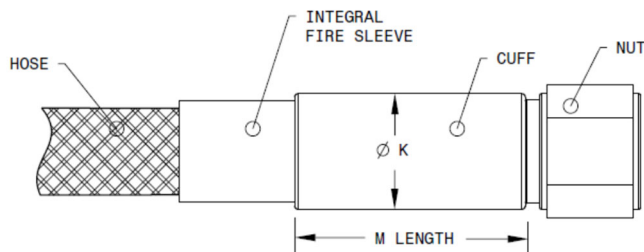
INTEGRAL FIRESLEEVE CUFF DIMENSIONS - SEE TABLE 7 /28/
